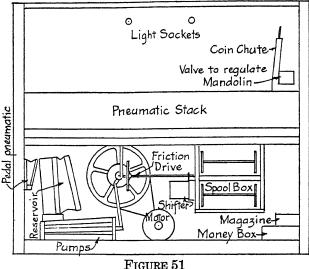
Assembly of parts: Seeburg coin-operated piano.
